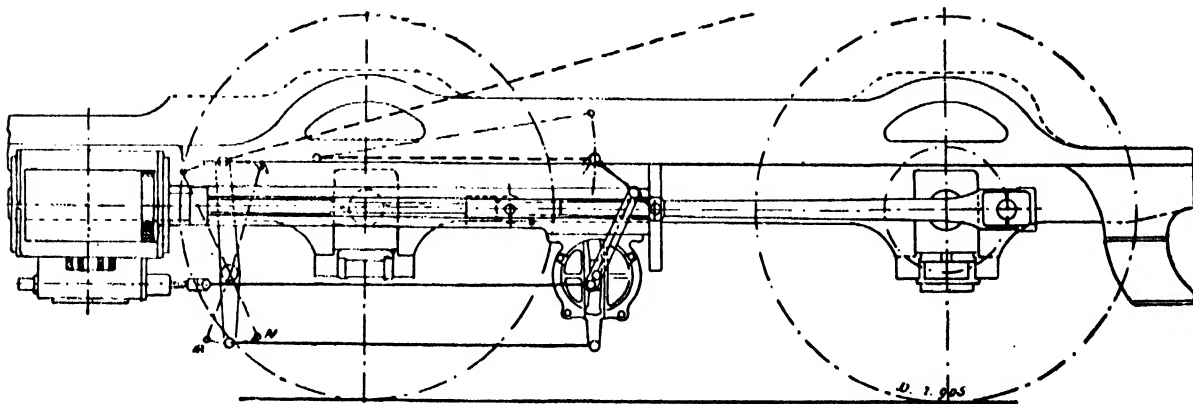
Arrangement of High-Pressure Cylinder Gear
